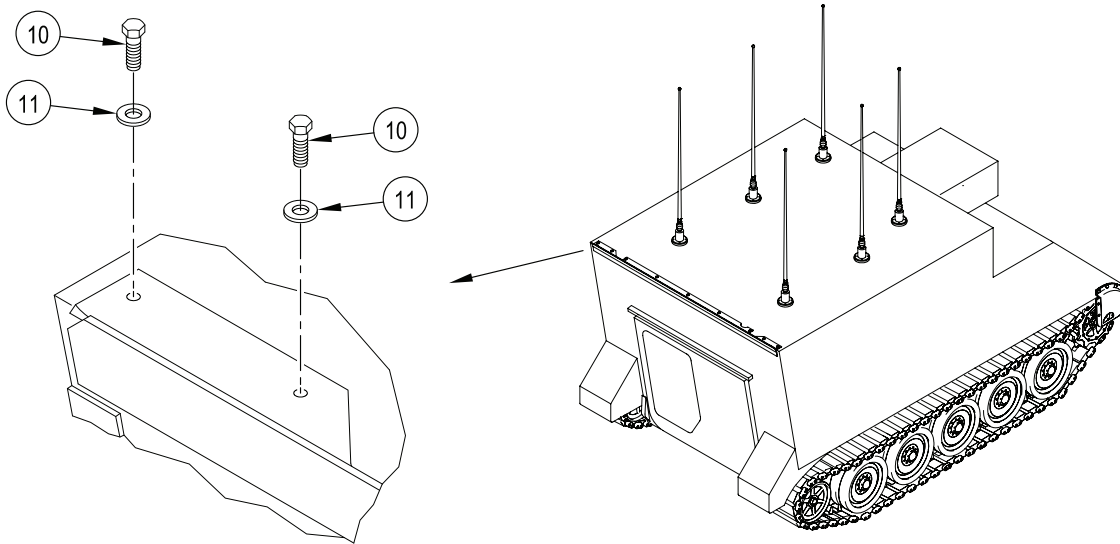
Extension Cover Tent Angle Bracket Mounting Hardware Removal
